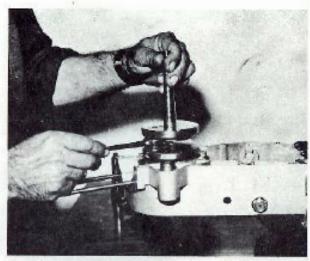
Remove the crankshaft and the connecting rod as one unit.
